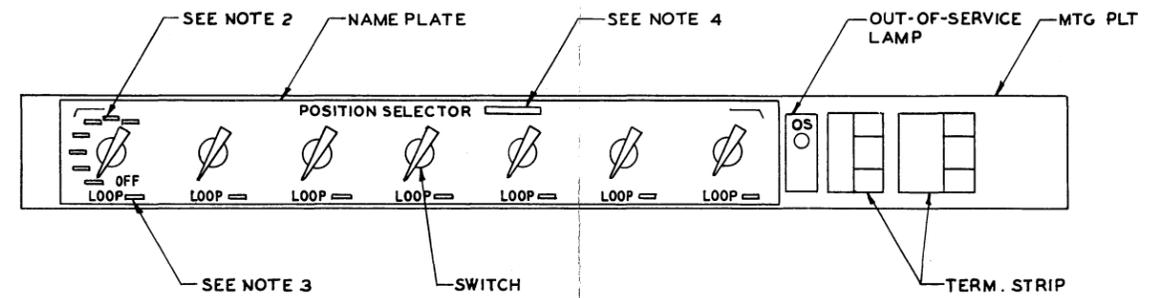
B - POSITION SELECTOR SWITCH UNIT
